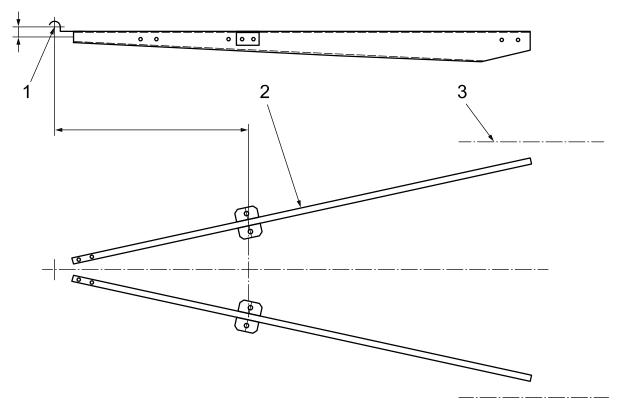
V-shaped drawbar bolted or welded to the ladder-frame
